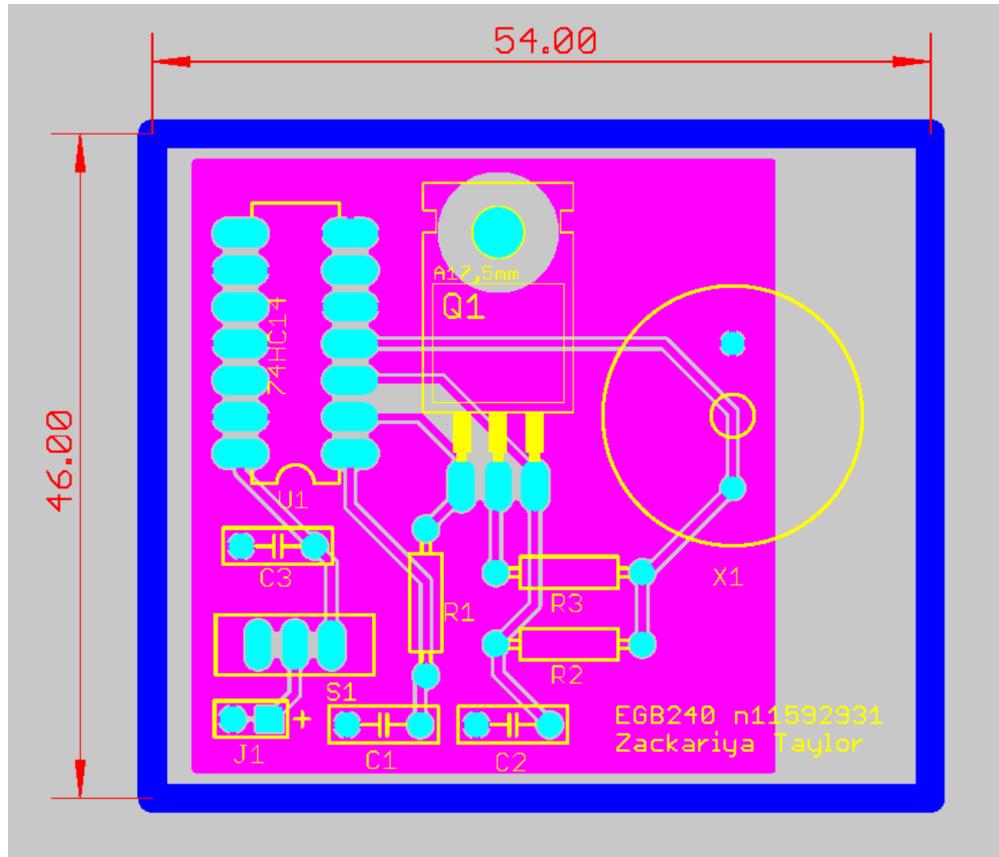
PCB layout of siren circuit (top side view), with board dimensions.
